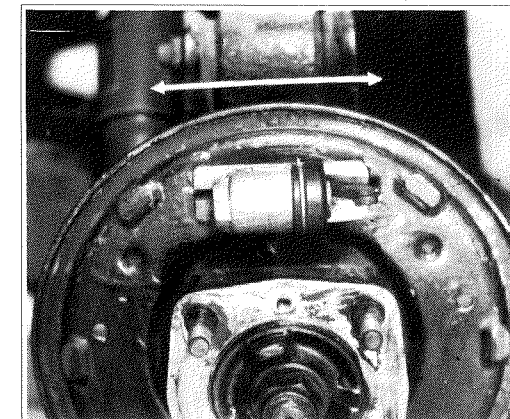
Ensure rear wheel cylinder is free to slide backwards and forwards on back plate.
